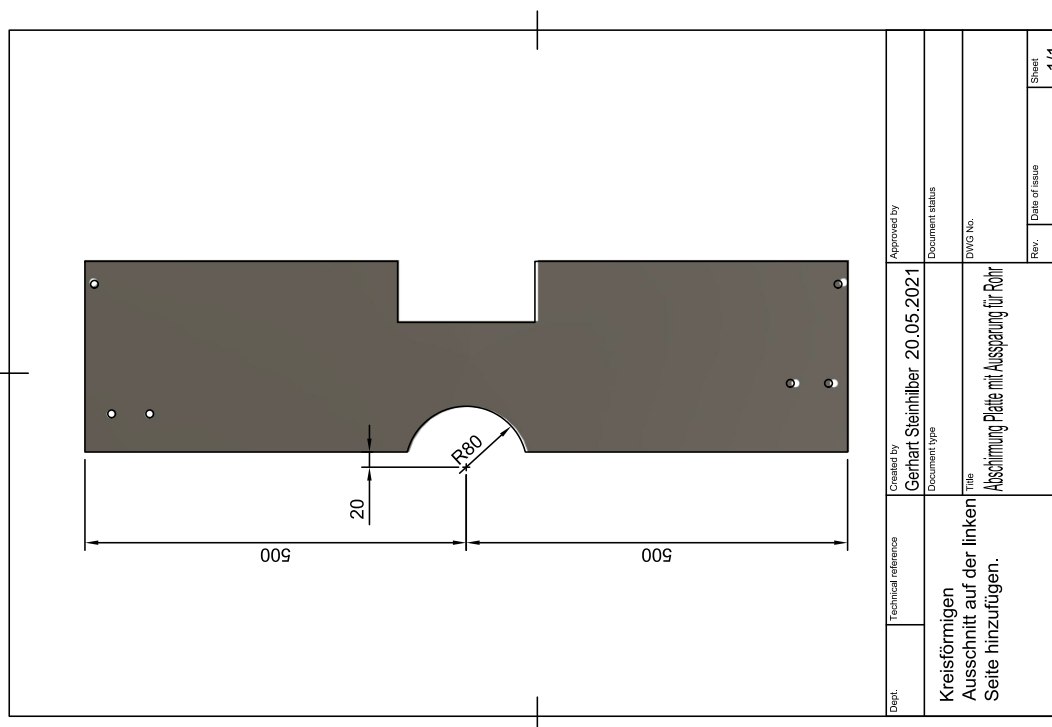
Technical drawing of the magnetic field shielding, which is attached to the front of the QCLAM spectrometer.
